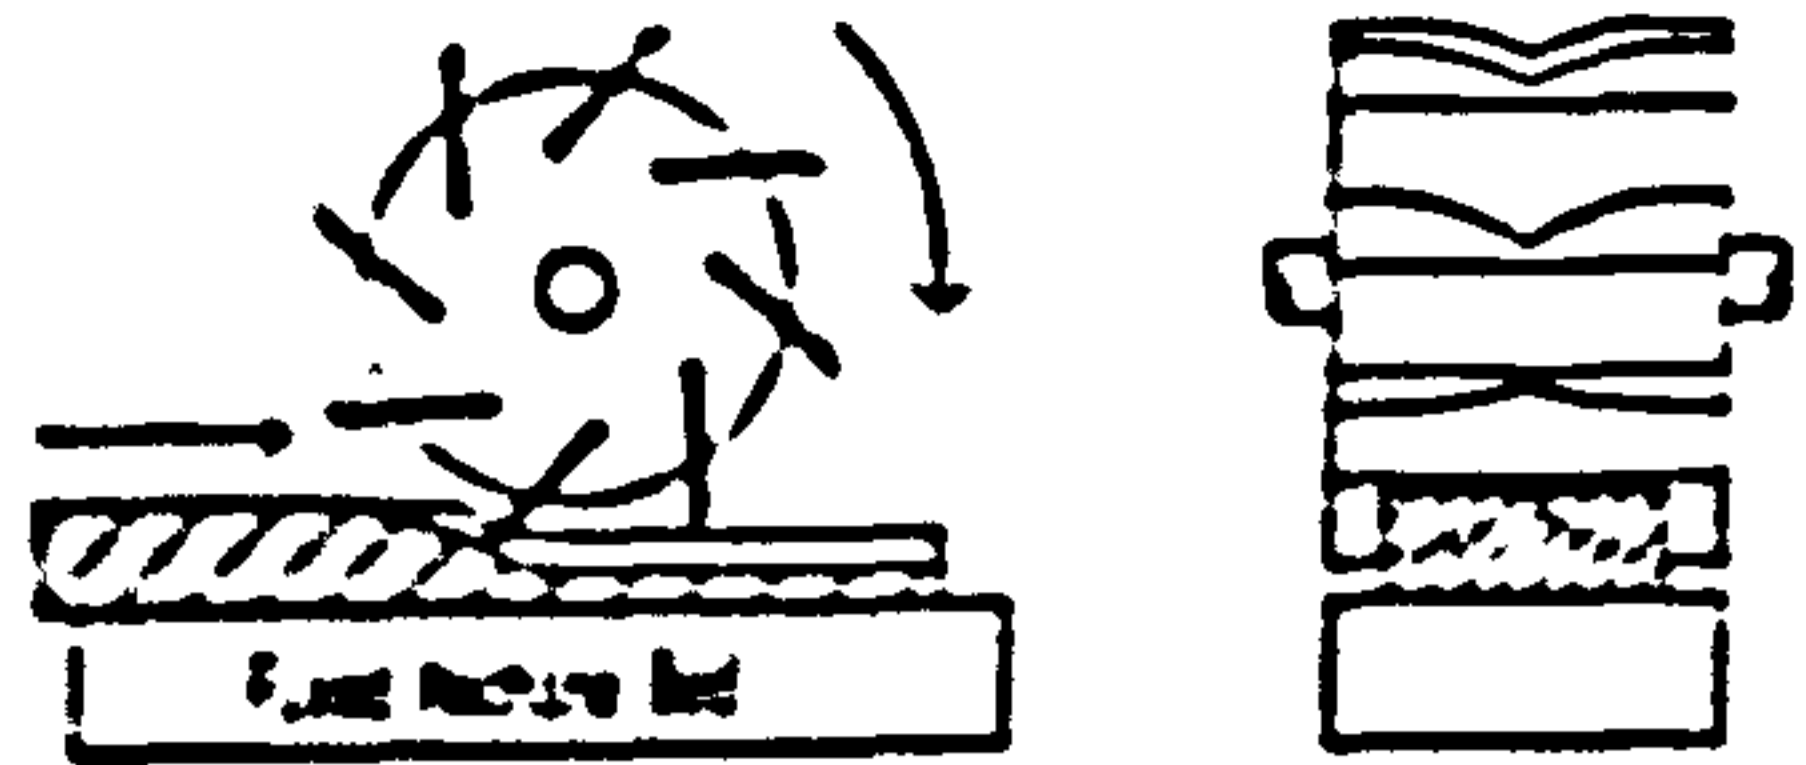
Moulding process showing single cutter head. The workpiece is traversed past the cutter head.
